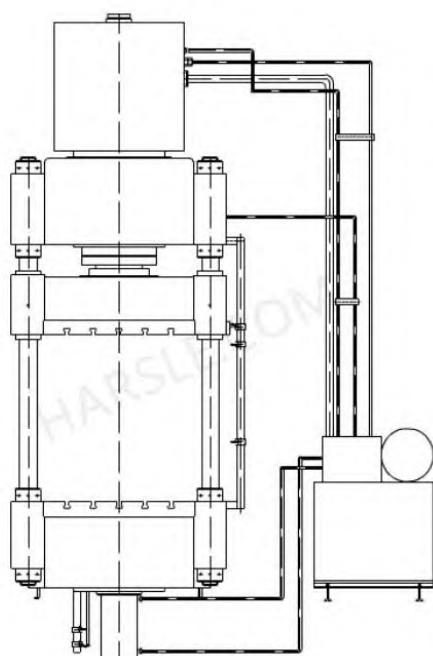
Four-column hydraulic press and hydraulic pump unit with 1 main and 1 blankholder cylinder [12].
